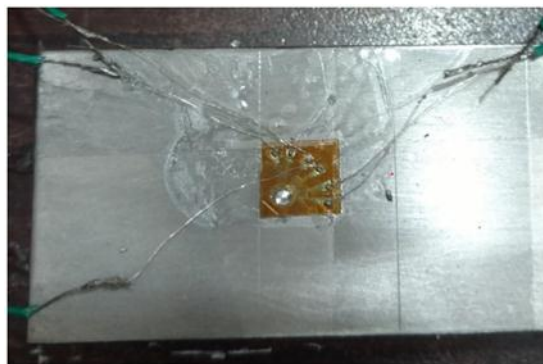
Welded Stainless Steel 304 after Hole Drilling Experiment
